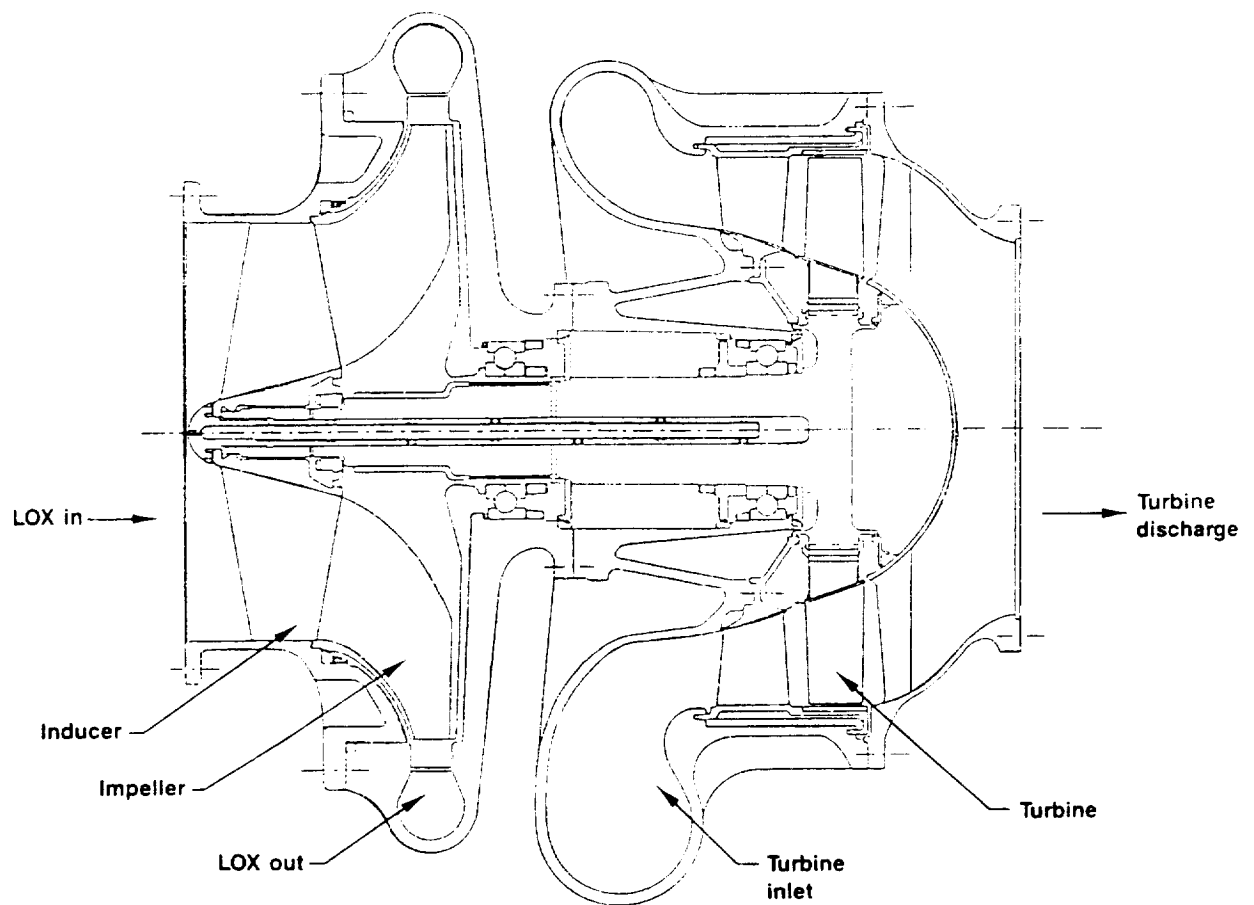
Single-Shaft Oxidizer Supply Turbopump Assembly
